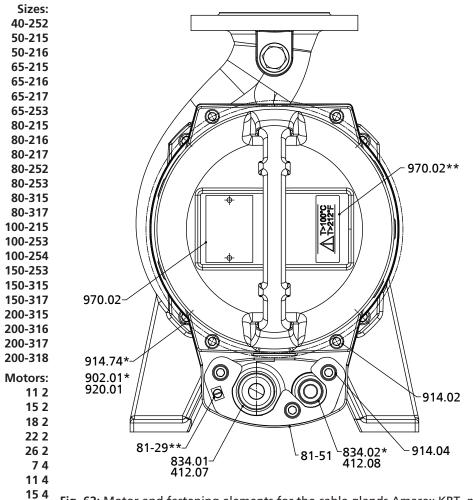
Motor and fastening elements for the cable glands Amarex KRT, motor type 2
